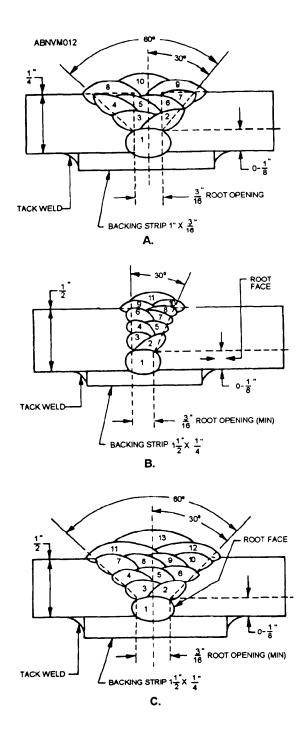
Use of backing strips in welding butt joints.
